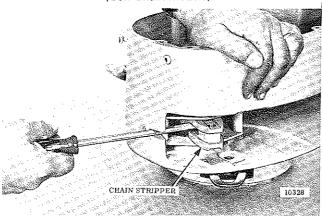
Chain Stripper Being Partly Removed From Chain Guide (Roller Chain Model)
